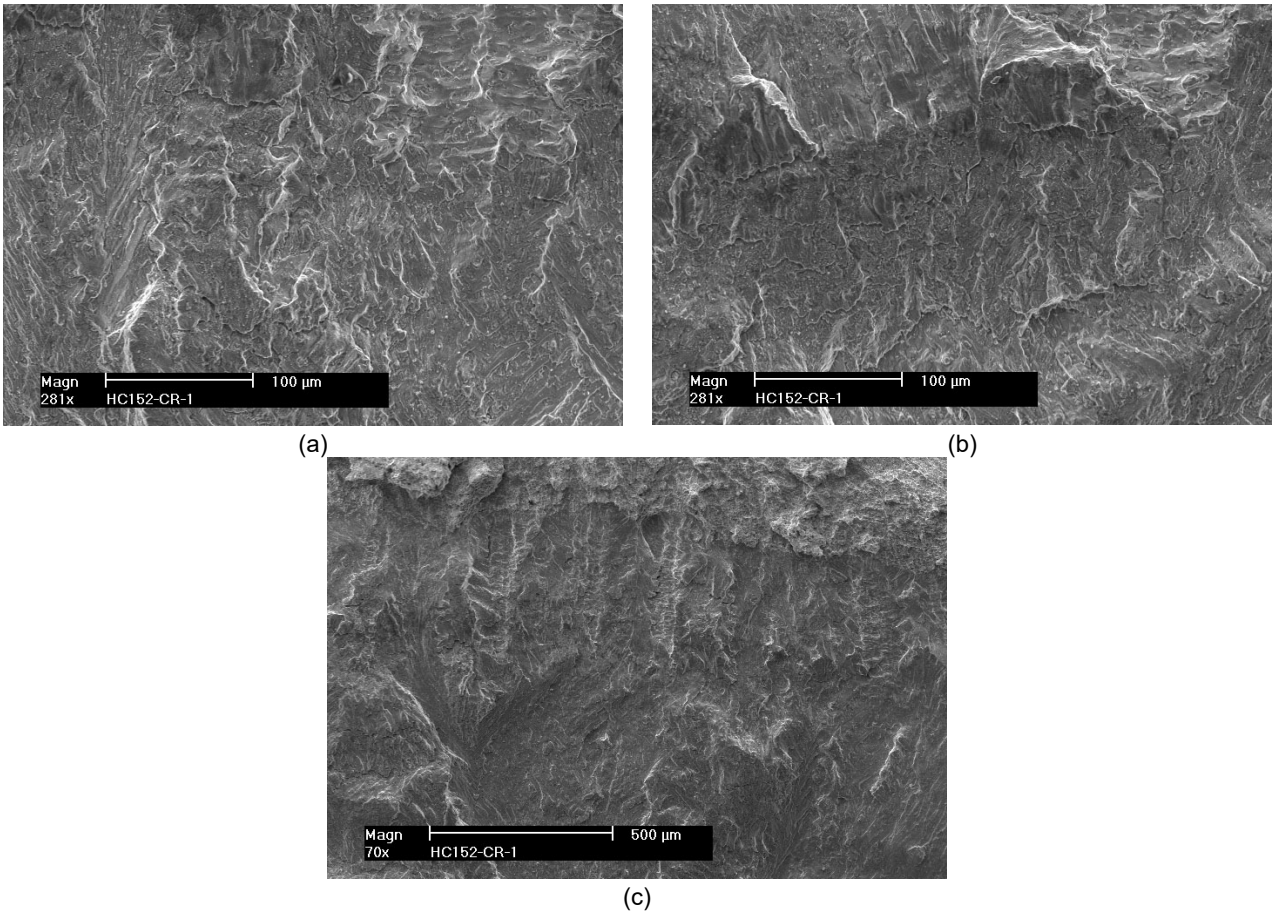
Fracture surface of specimen HC152-CR-1, region IG-2 at location: (a) 1, (b) 2, and (c) 3 in Figure 76. Crack advance is from bottom to top.
